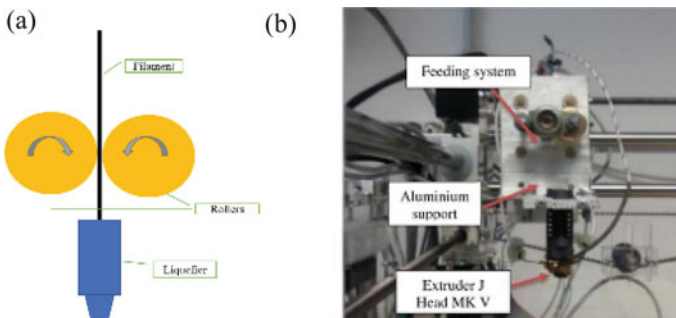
a Material feed mechanism for FFF based 3D printer, b assembly of liquefier, print head, and gantry [33]
